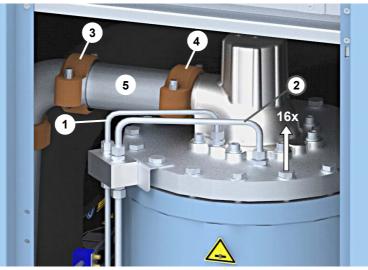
Drainage pipe, ventilation pipe, air pipe and receiver screws
